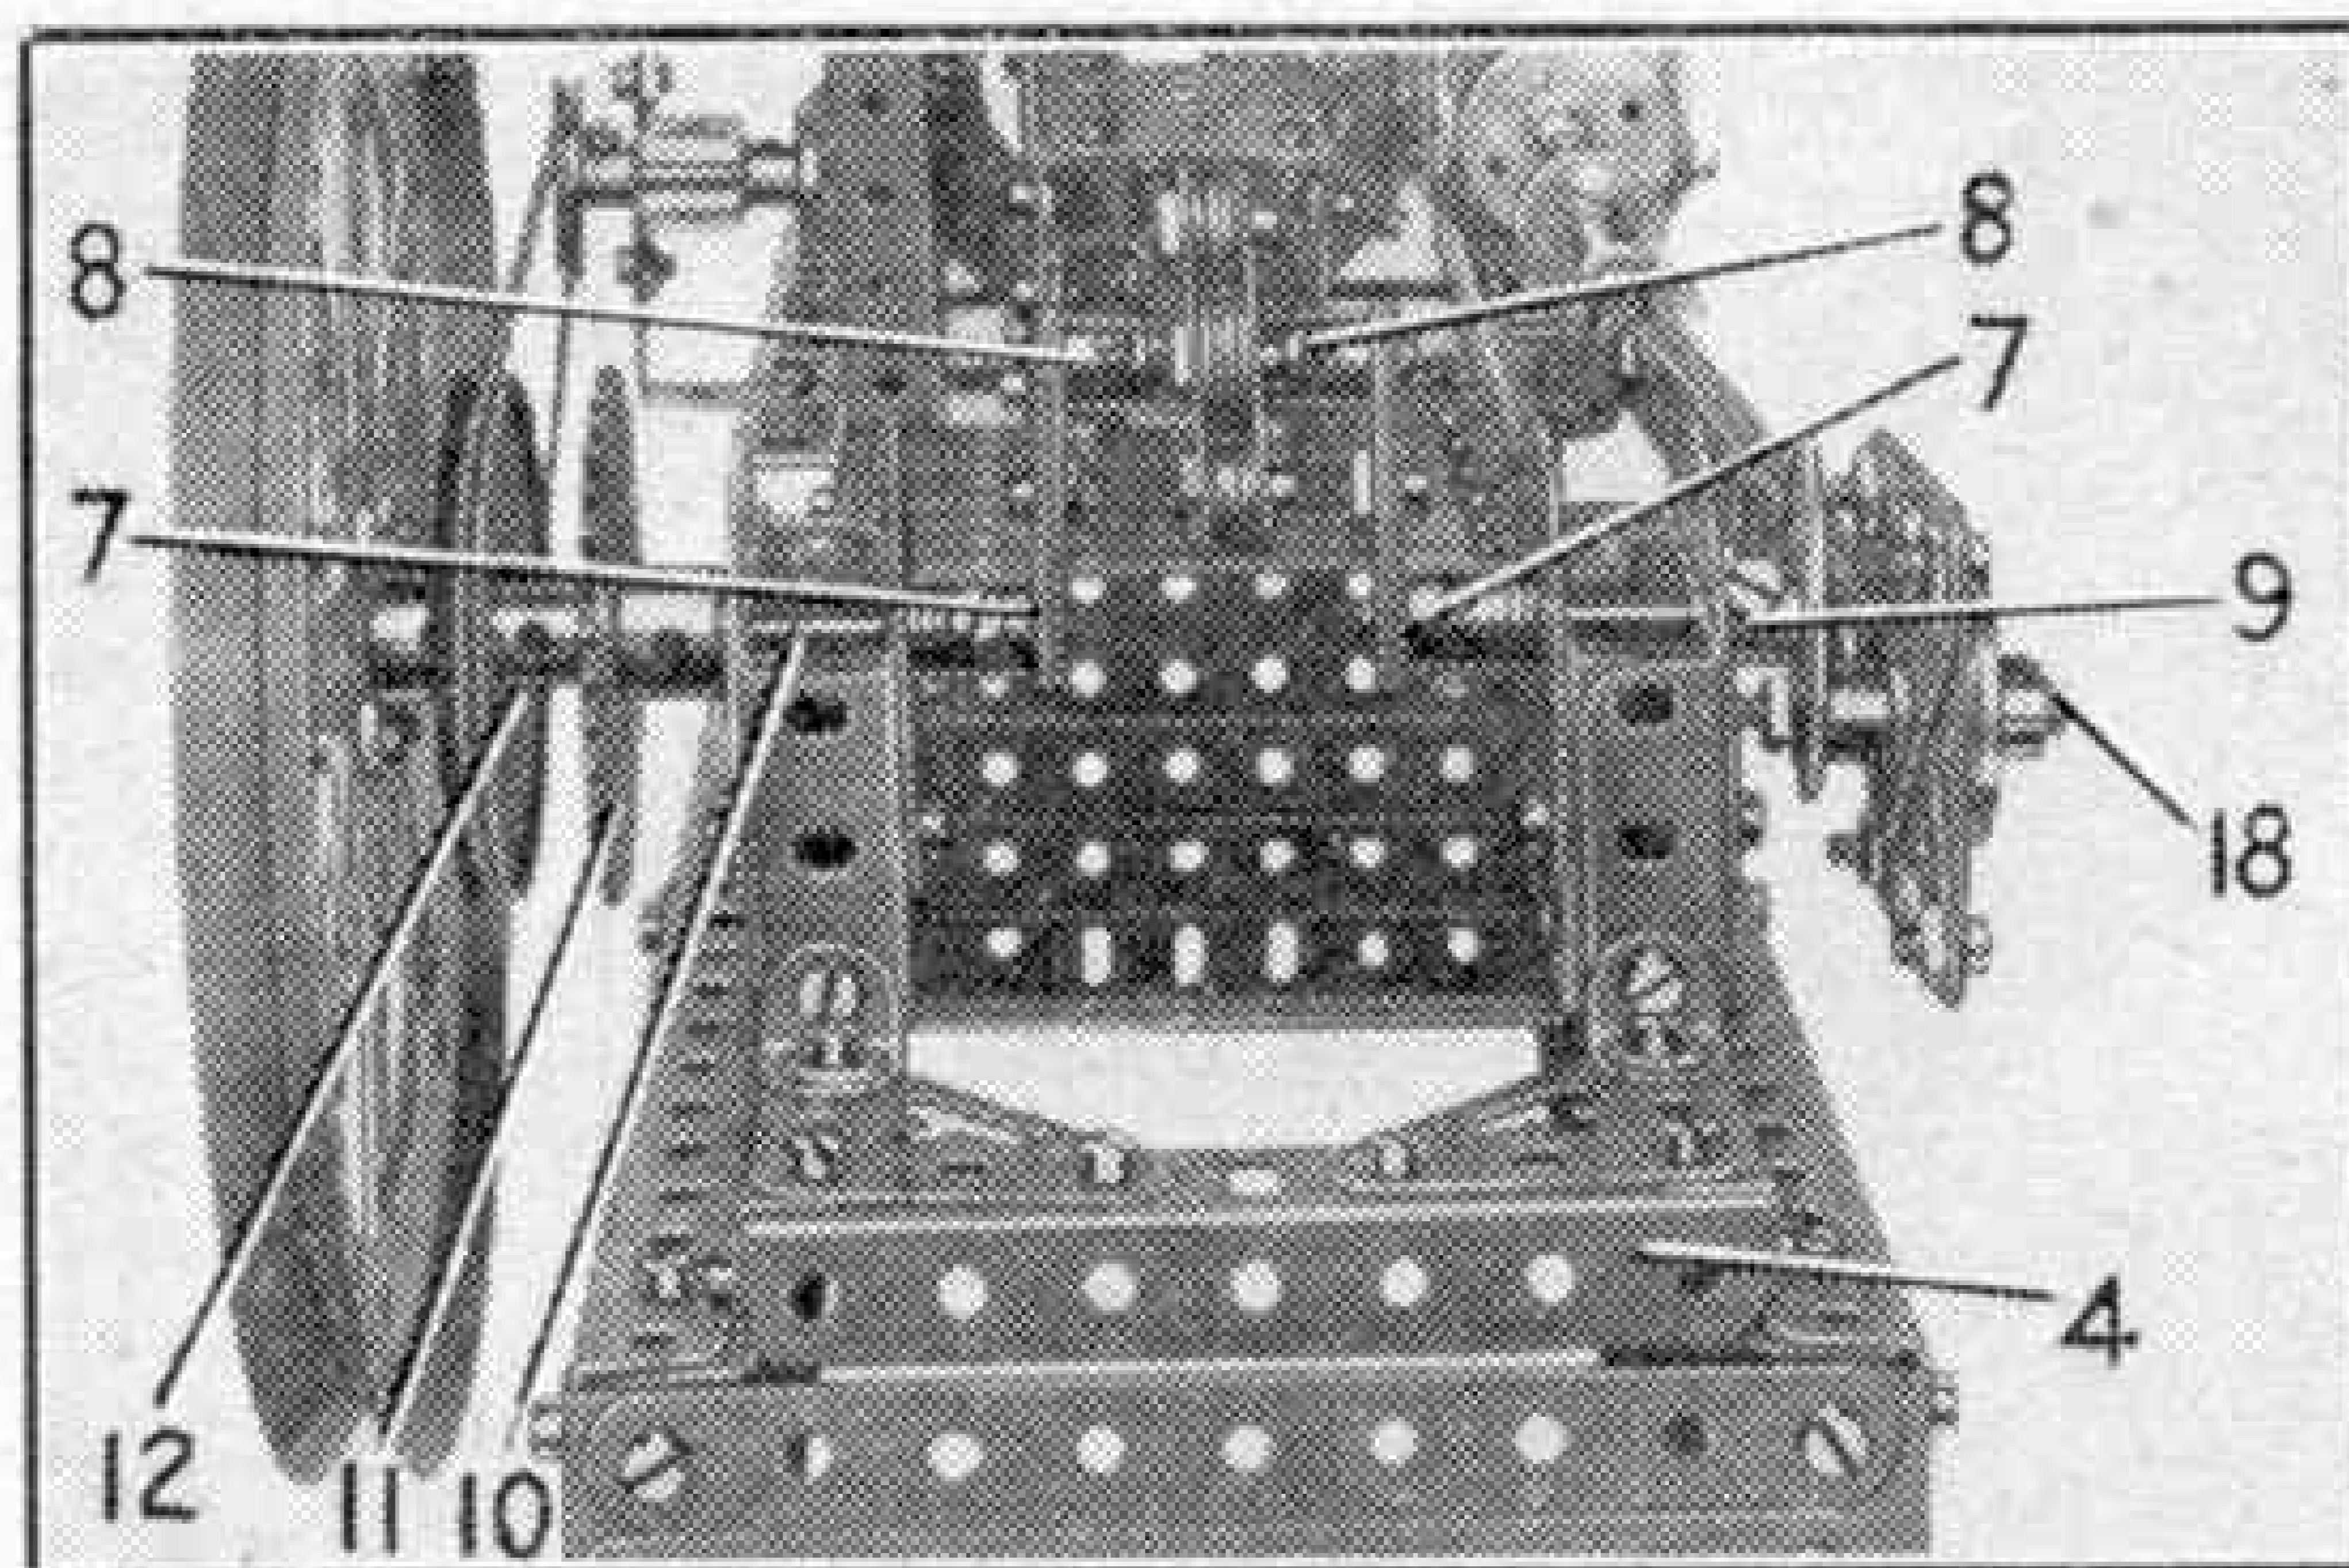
An end view of the steam engine showing details of the crankshaft.
